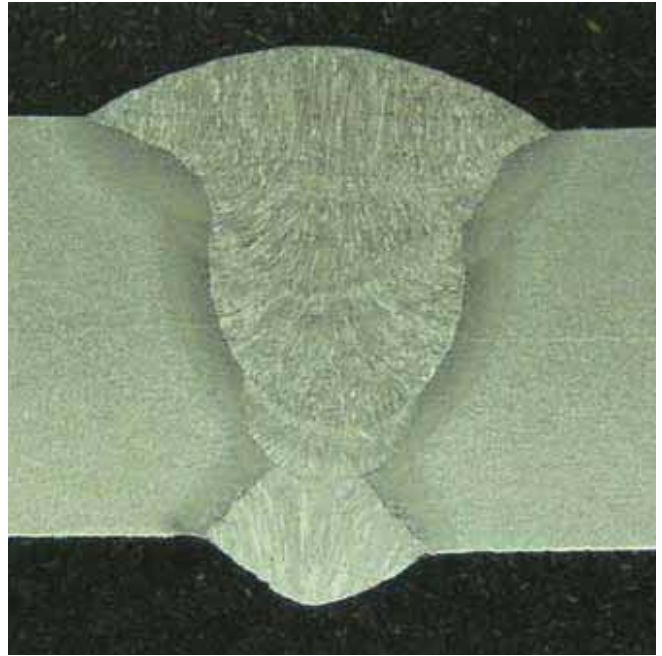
Cross section of a typical mechanized GMAW-P girth weld. Note the narrow bevel.
